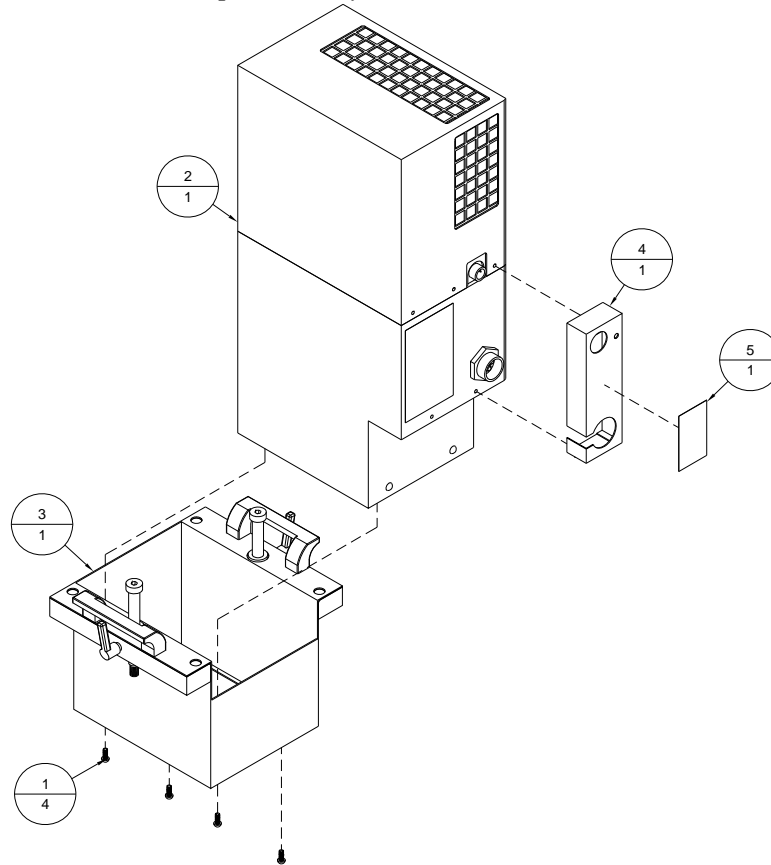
(9100409A), Lamp Assembly, UV I300MB
